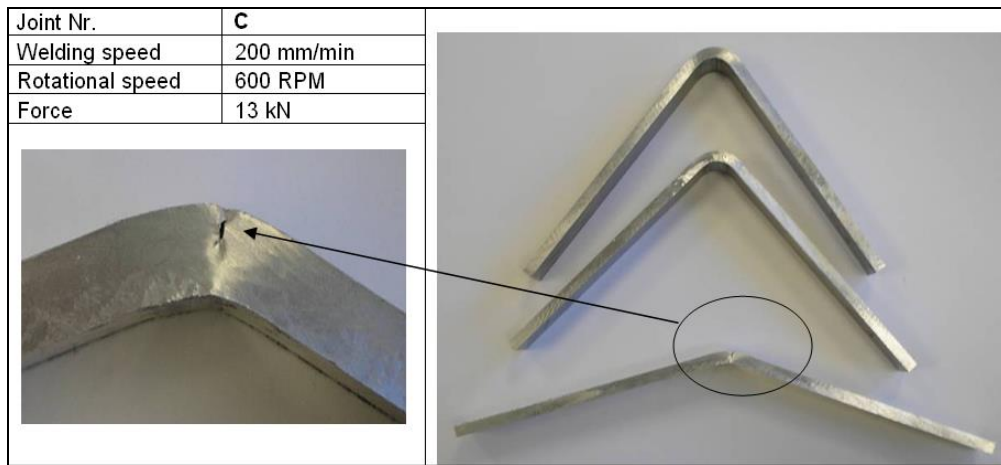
14. Bending specimens for 5083-H111 joint root (up) and joint surface (down). Surface rupture
